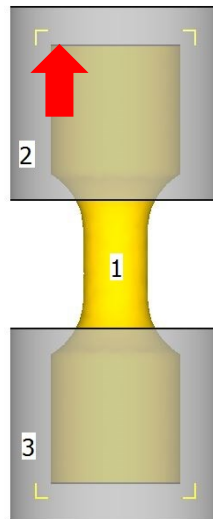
Assembly of 3D models of tooling and workpiece for modeling the stretching process: 1 – workpiece; 2 - upper holder; 3 - lower holder.
